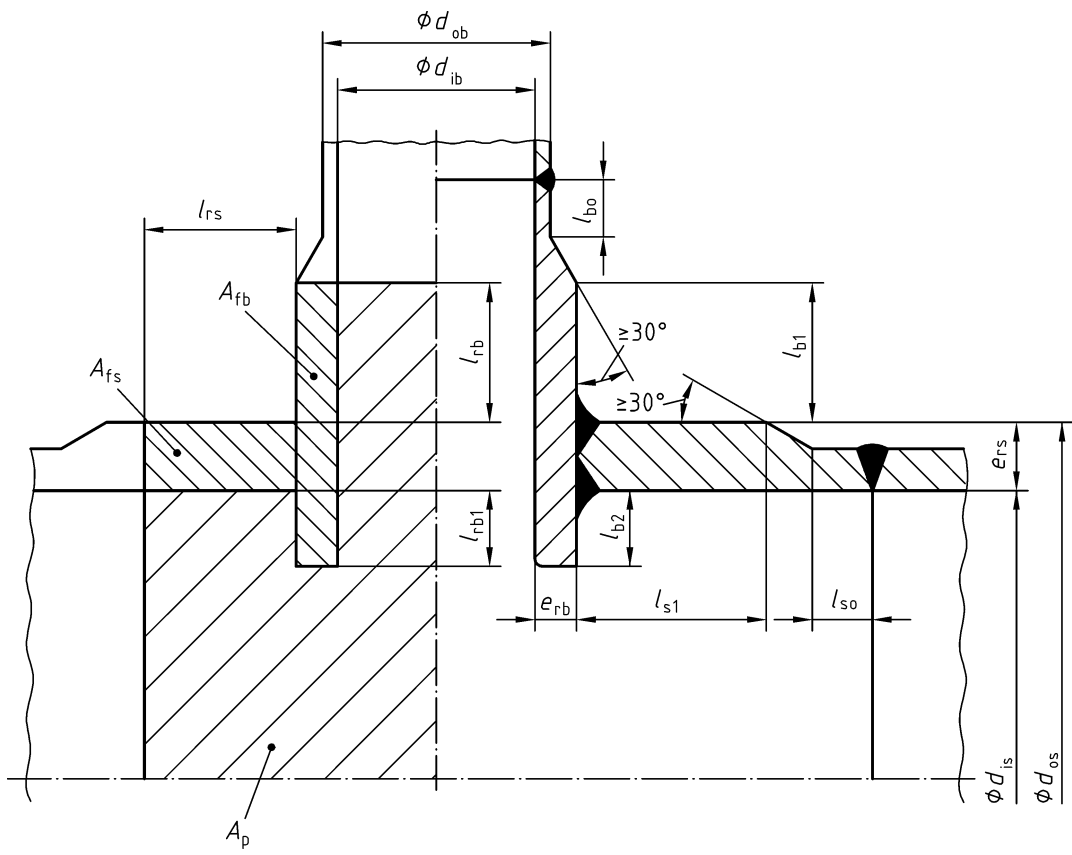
Reinforcement by set-through and full penetration welded branch
